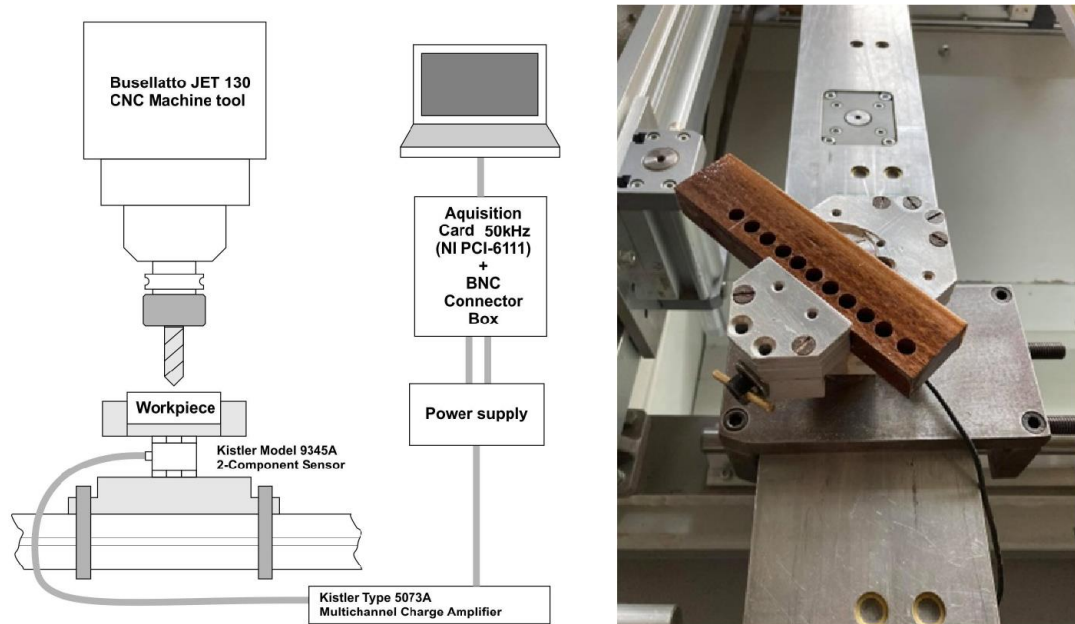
Schema of measurement platform used to measure feed force and torque and view of the mounted sample
